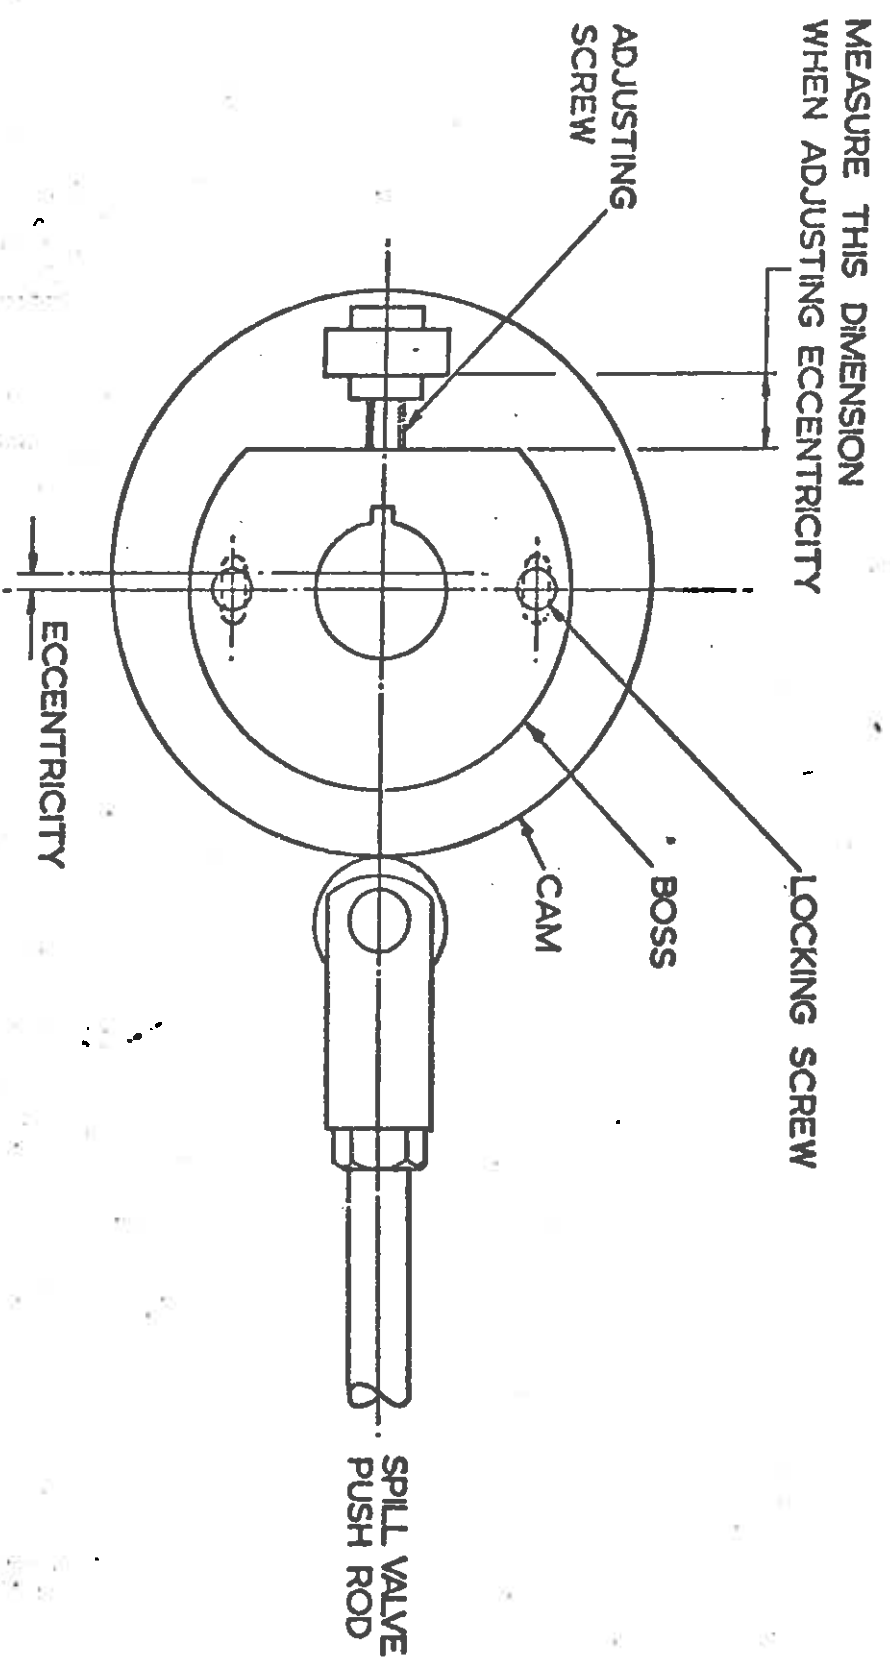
B. DETAIL OF MODULATING OIL CAM IN LOW FLAME POSITION
